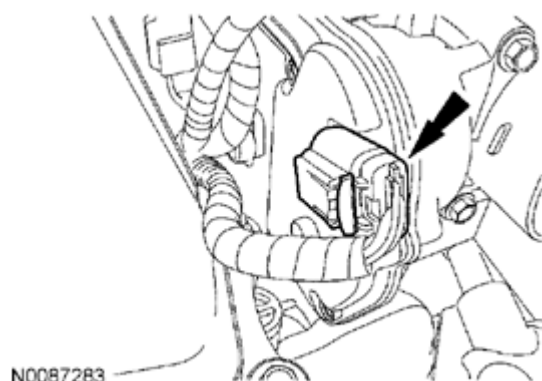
Locating Electronic Throttle Control Electrical Connector
